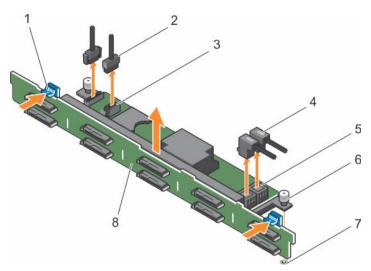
Removing and installing the 2.5 Inch (x10) hard-drive backplane
